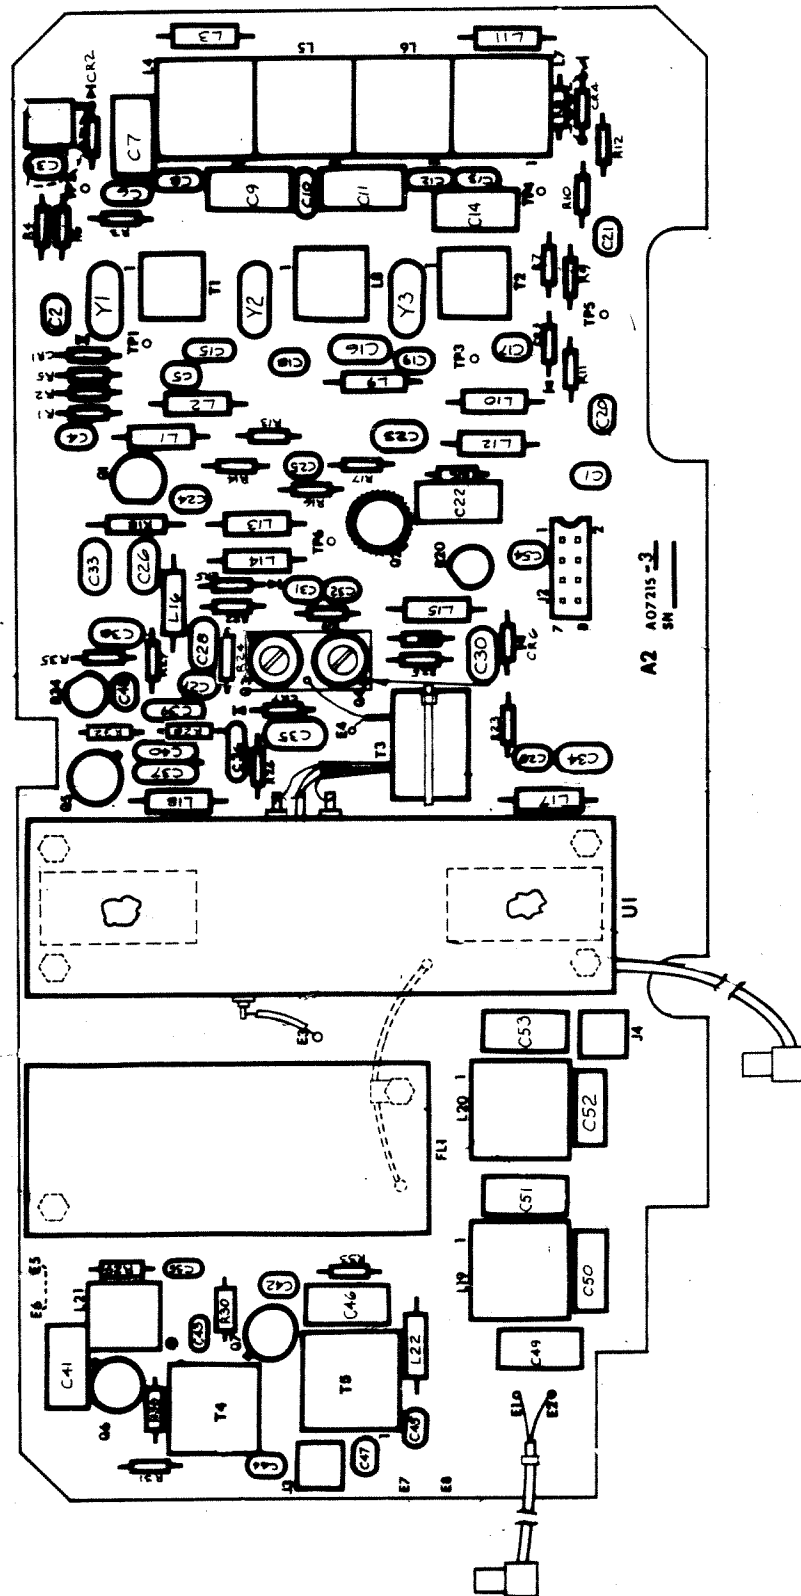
B. First Mixer A2, Circuit Card Assembly
